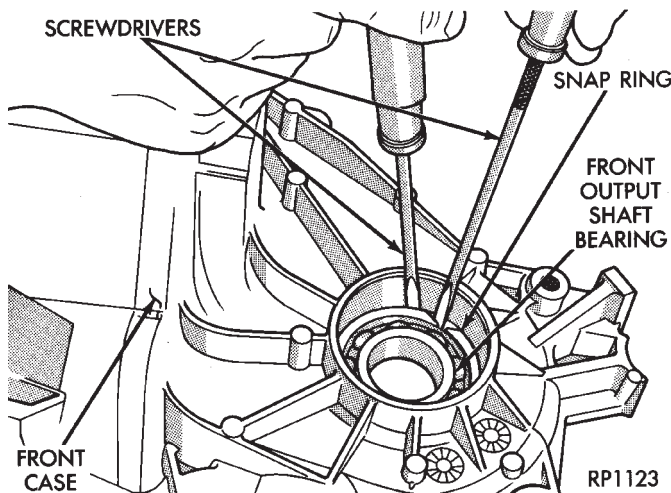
Removing/Installing Front Output Shaft Bearing Snap Ring
